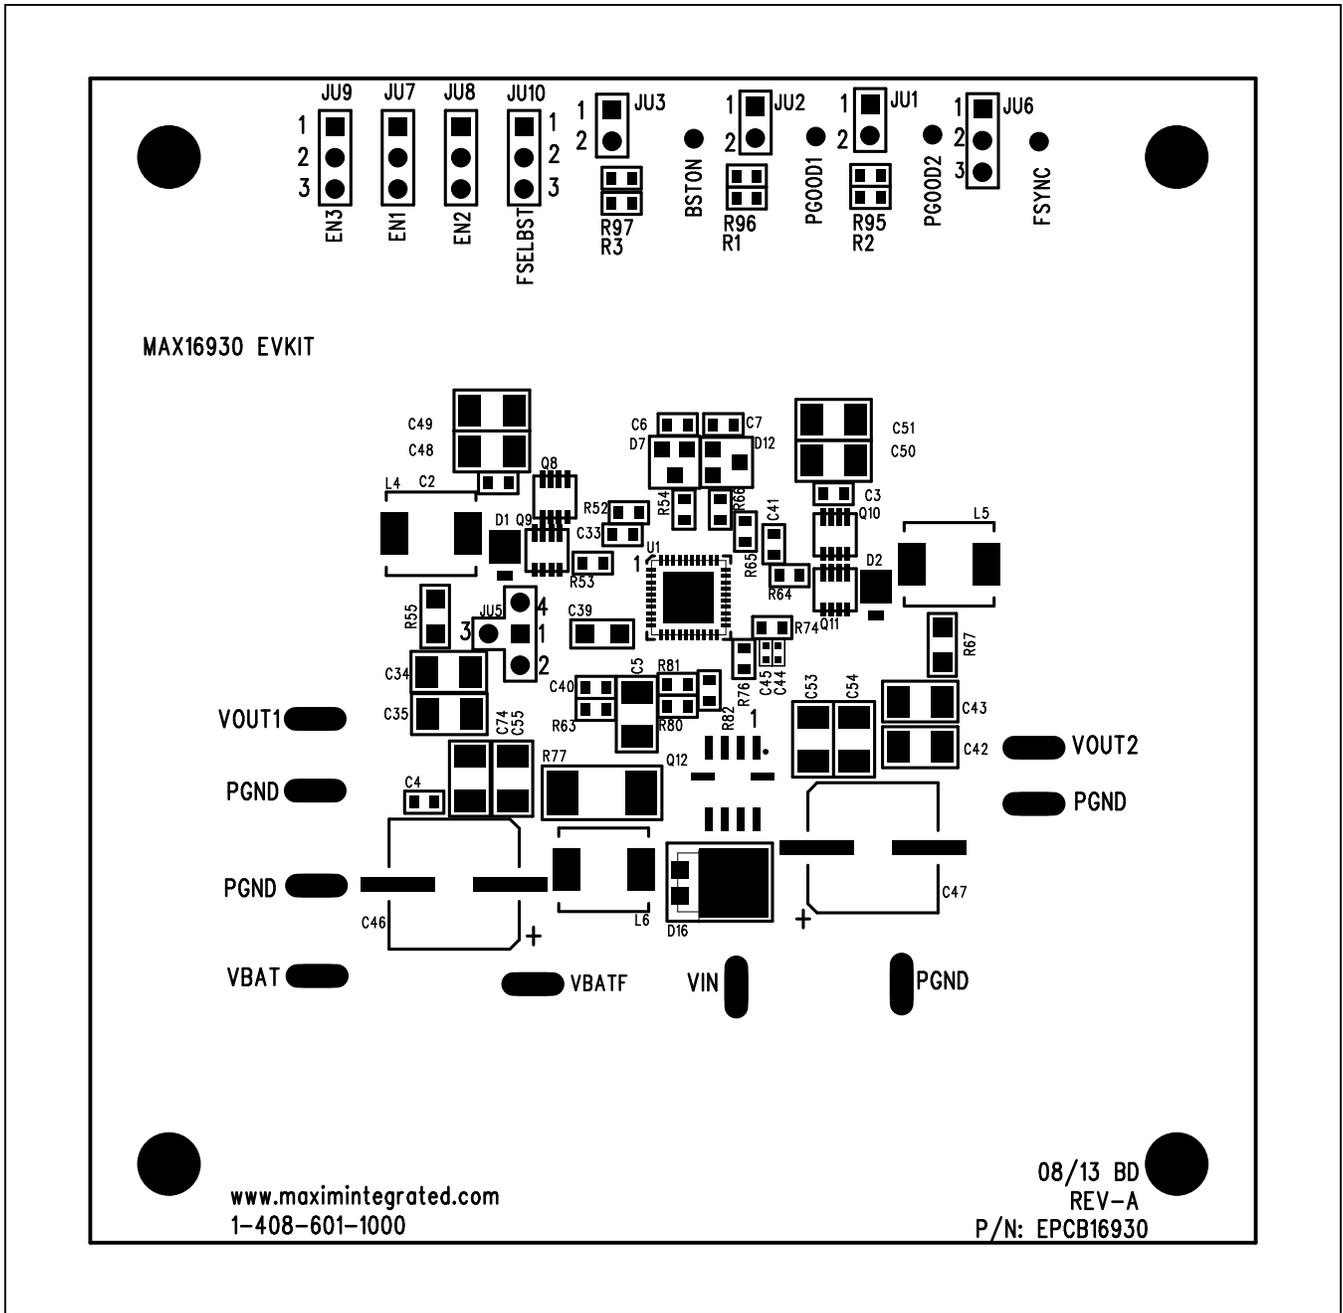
MAX16930 EV Kit Component Placement Guide—Component Side
